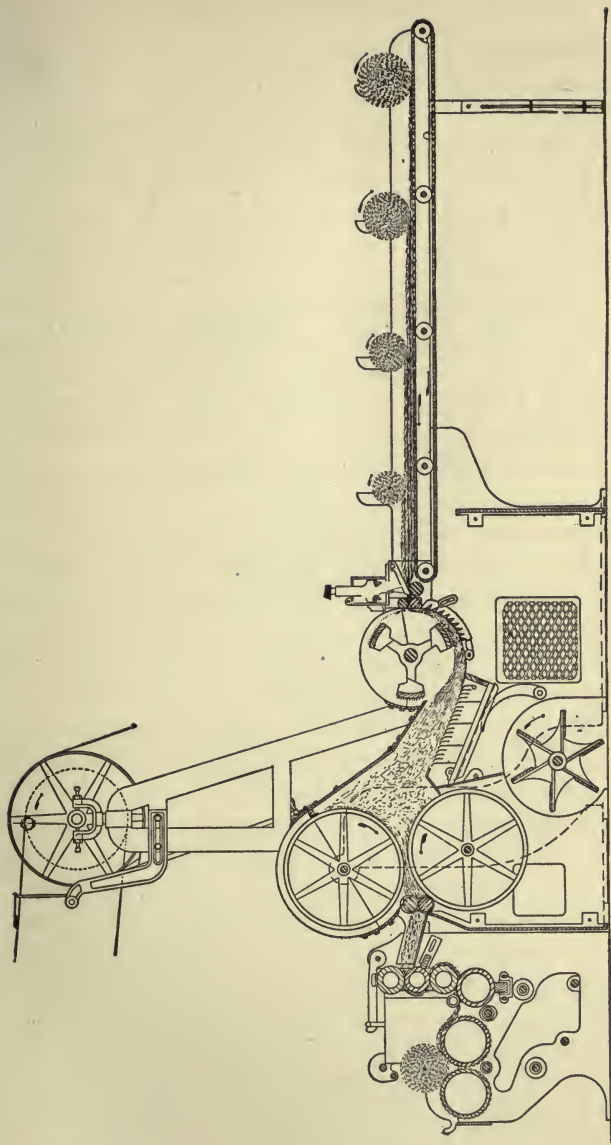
SECTIONAL VIEW OF FINISHER.
